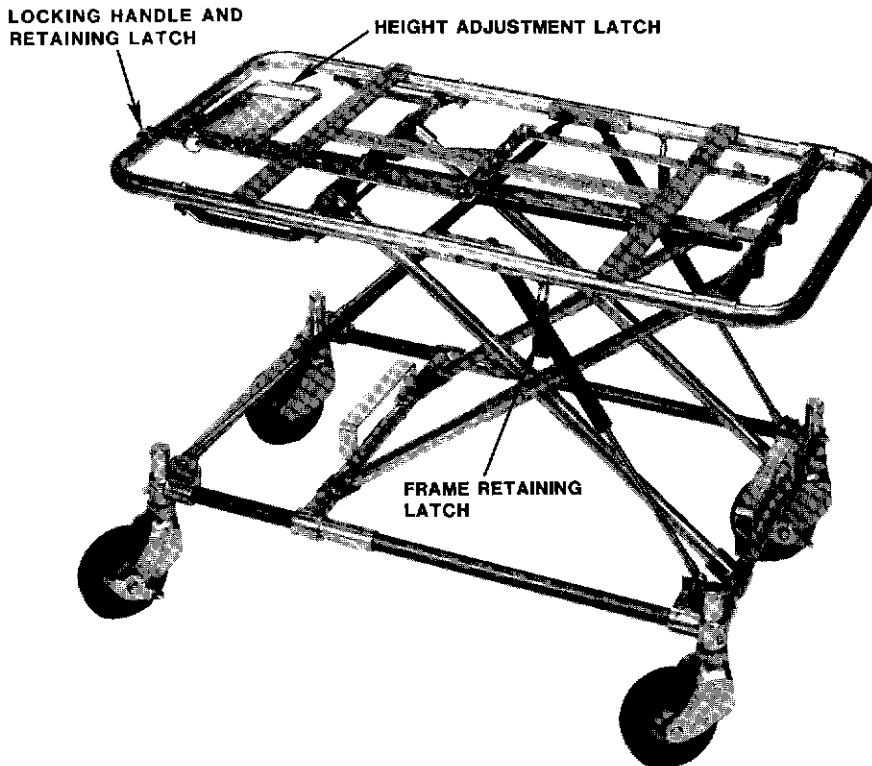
ADJUSTABLE STAND ASSEMBLY
